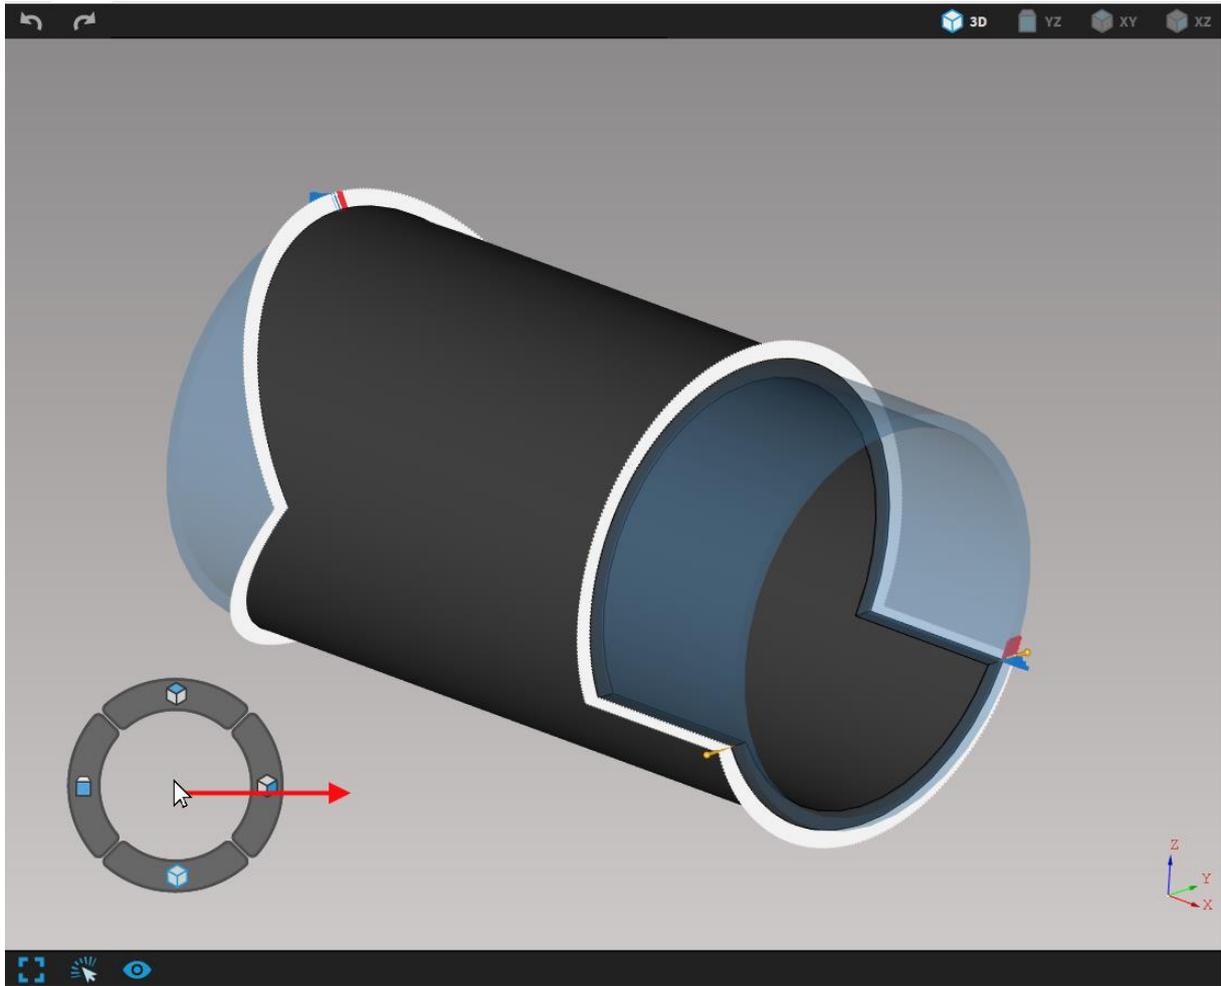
Without releasing the right mouse button it has to be dragged over the view user wants to select (in this case, XZ view would be selected)
